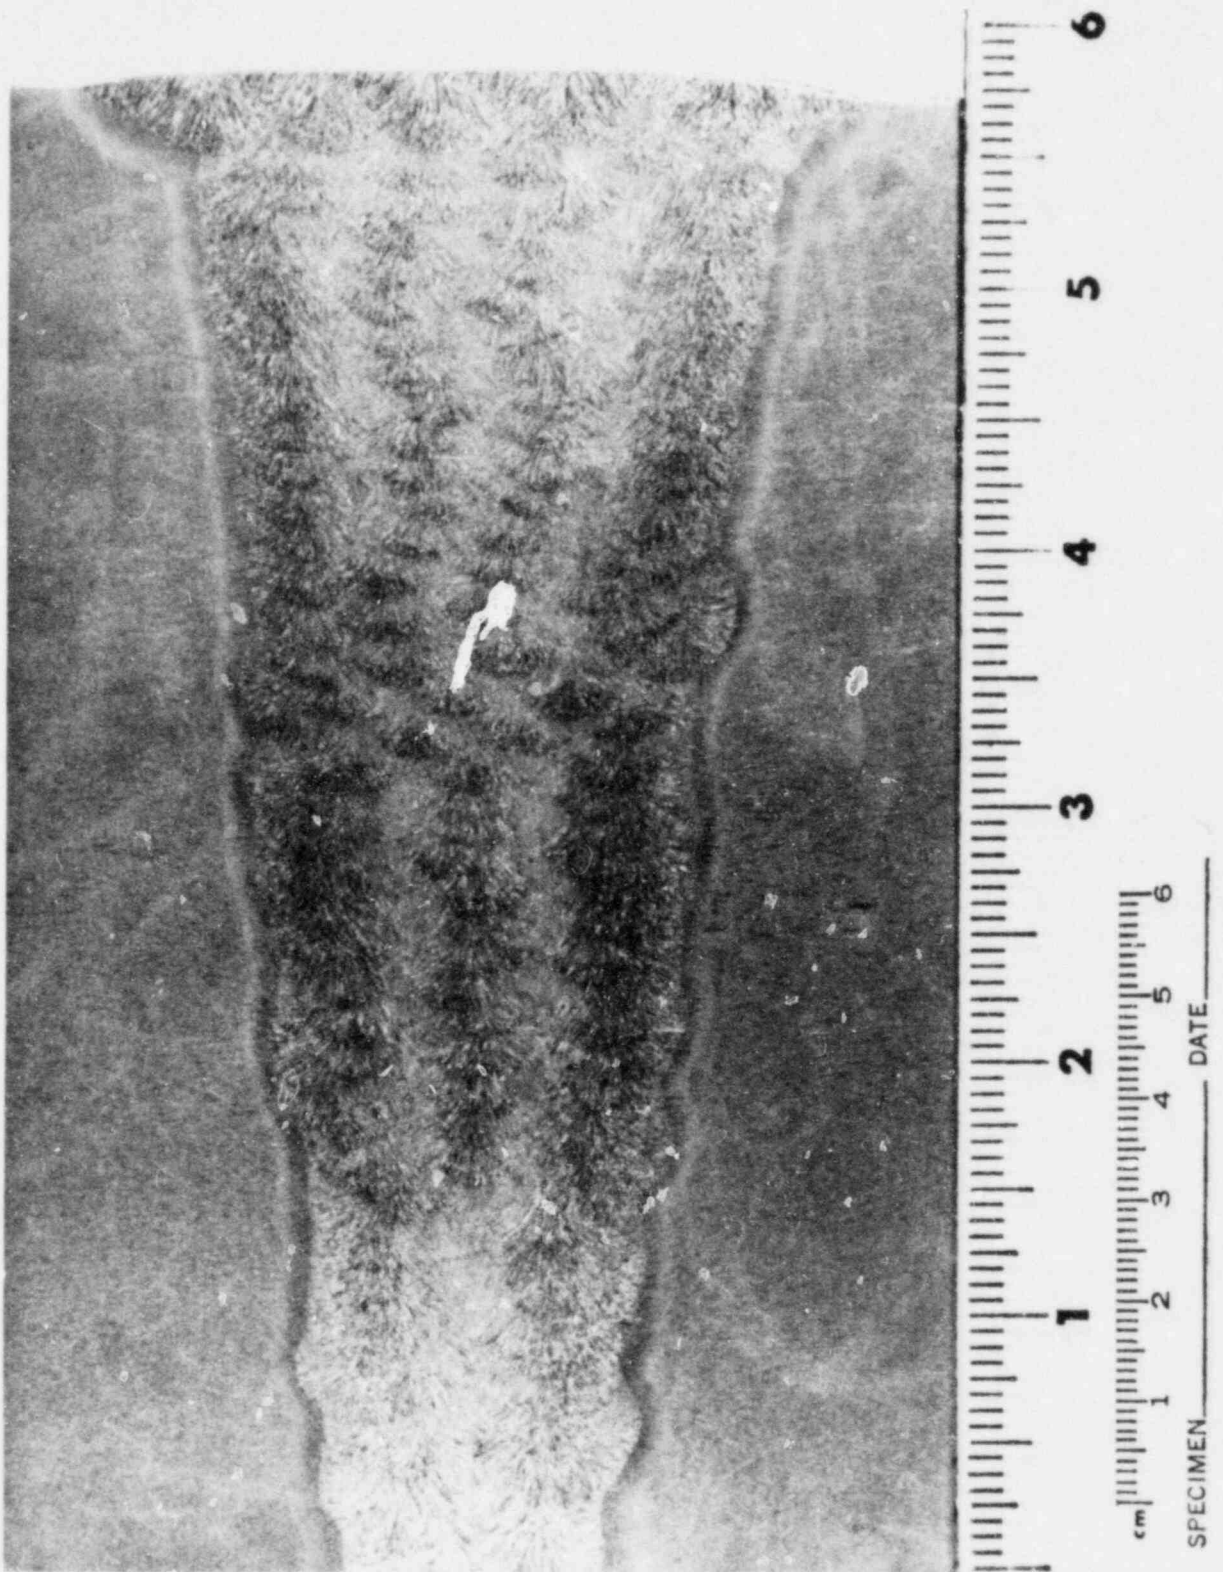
Photomicrograph of Weld V842 Cross-Section
